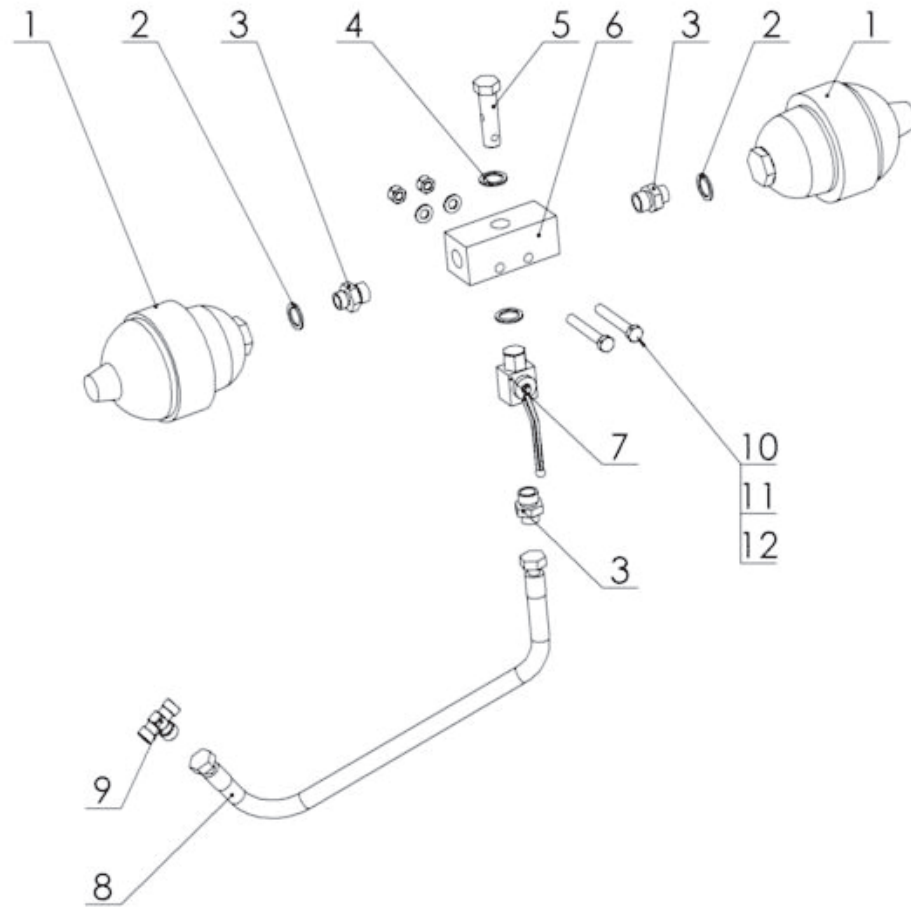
Hydraulic accumulator unit ("C" assembly)
